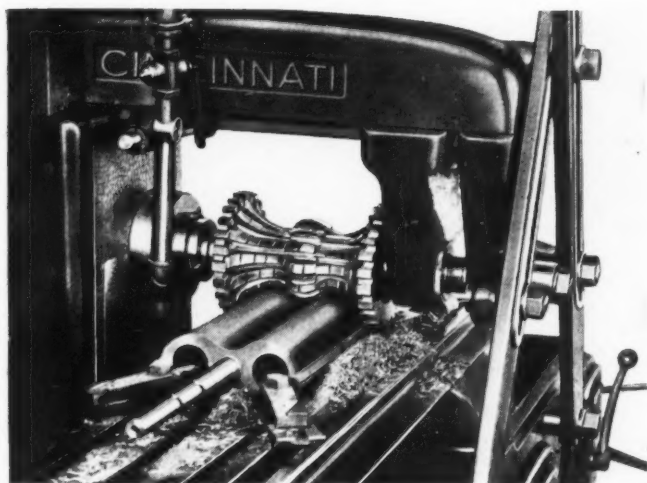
Milling Cast-iron Impellers for Blowers with a Five-piece Interlocking Form Milling Cutter
